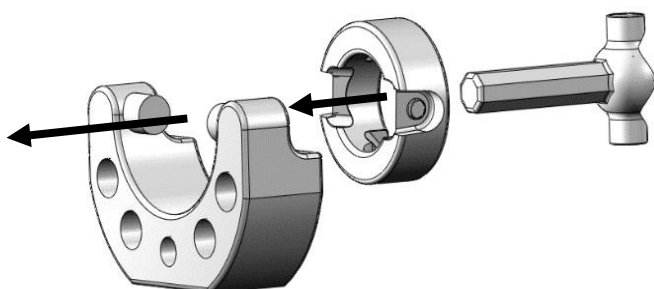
Assembly of the joint in the cardan ring in the frame stand.
